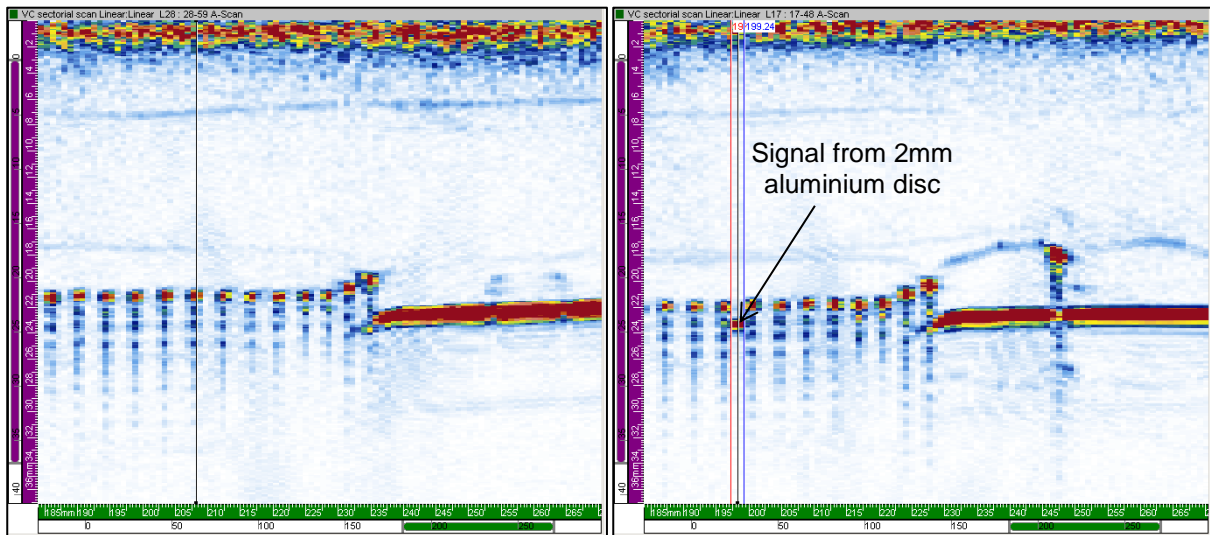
B-scan images of electrofusion welds in 225mm PE pipes: unflawed weld (left), and weld containing a 2mm aluminium disc (right).
